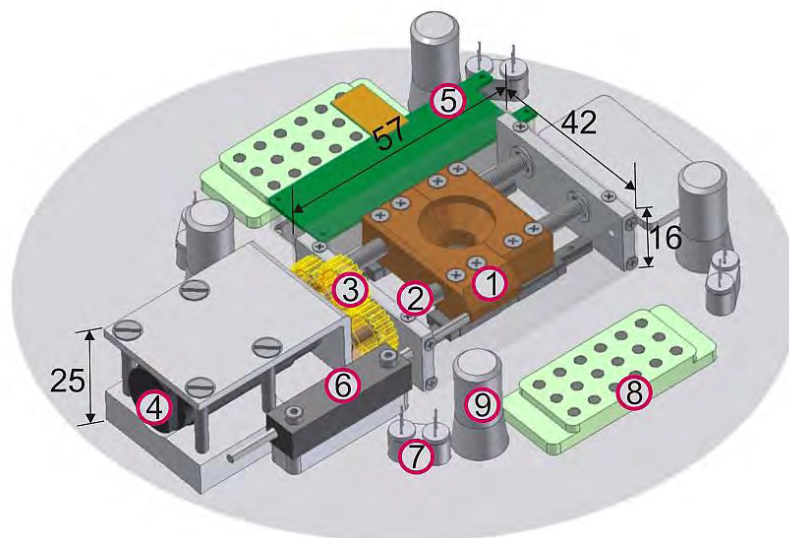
The Active part of the latch mechanism involved in the RIMRES project robots Sherpa and CREX [34]. (1) Braces (2) Threaded spindles (3) Gears (4) Actuator (5) Camera (6) Linear potentiometer (7) LEDs (8) Signal block (9) Cylinder.
